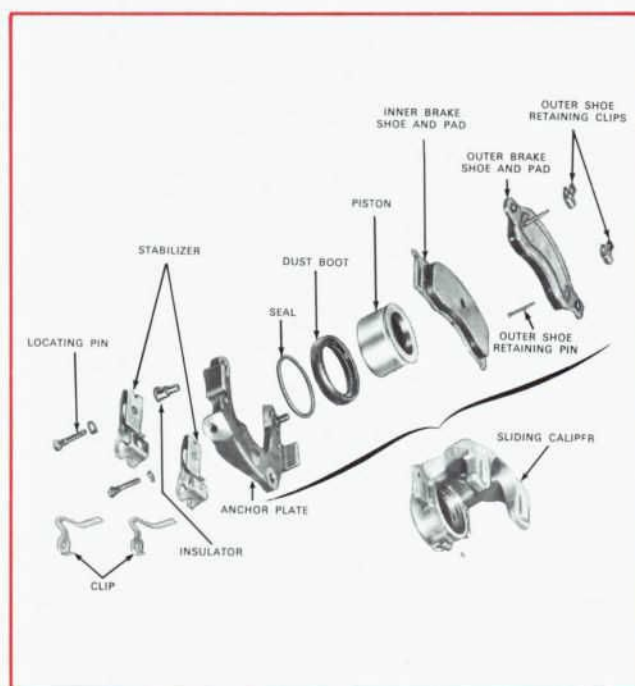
The floating caliper disc brake disassembled. Note the insulator position to the anchor plate.
